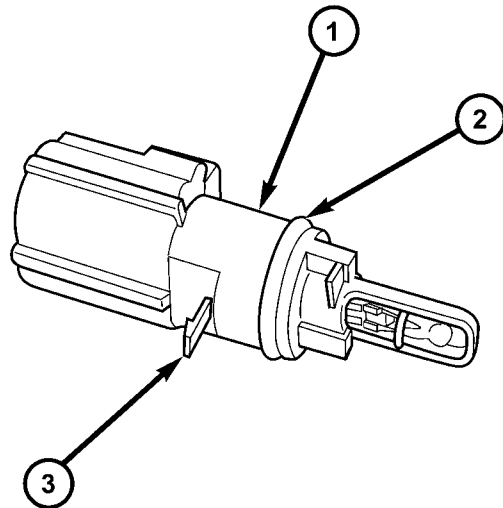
IAT SENSOR TAB / O-RING - 2.4L
